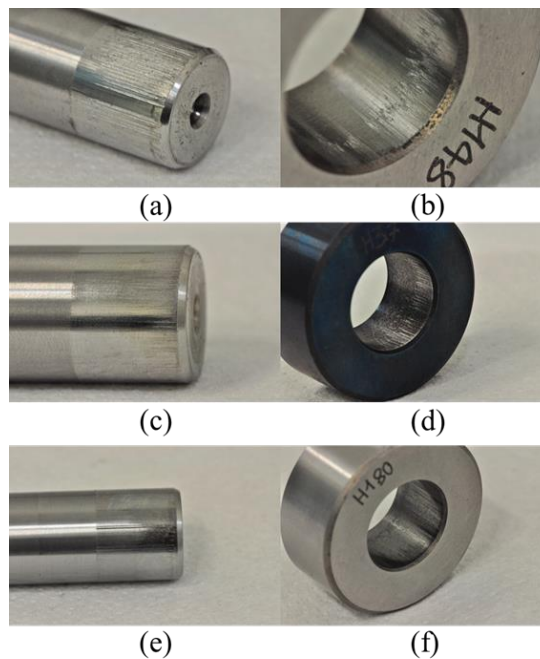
Example of shaft and hub coupled with: (a)-(b) press-fitting technique and no adhesive, (c)-(d) shrink-fitting technique and no adhesive, (e)-(f) press-fitting technique and not cured adhesive
